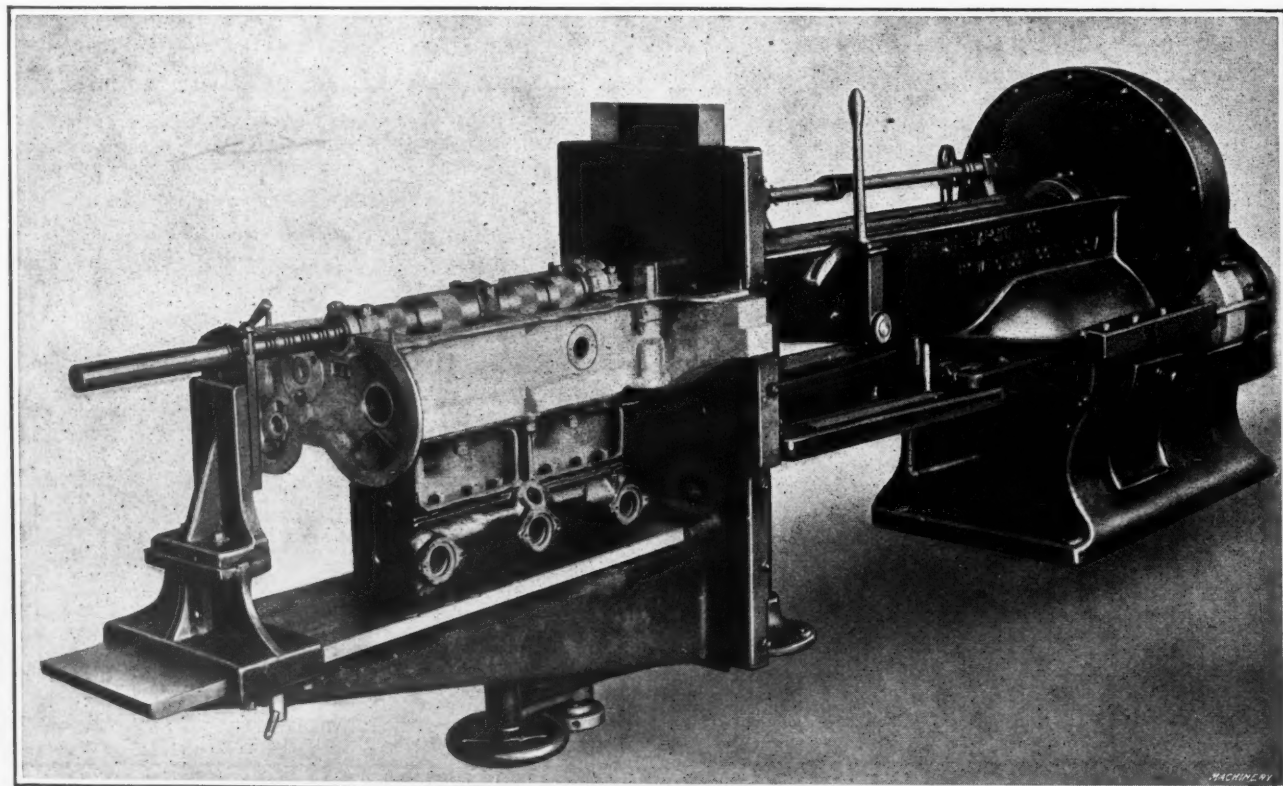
Machine equipped for broaching the Camshaft Bearings in the Crankcase of a Motor Car Engine
